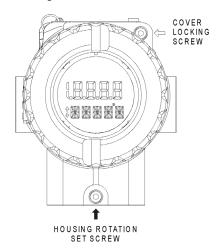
Cover Locking and Housing Rotating Set Screw
